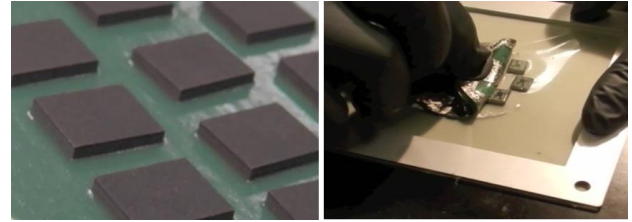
Demonstration for Chips attachment on carrier (left) and Detach chips from carrier after plating (right) for process of singulated chips with solder balls.
